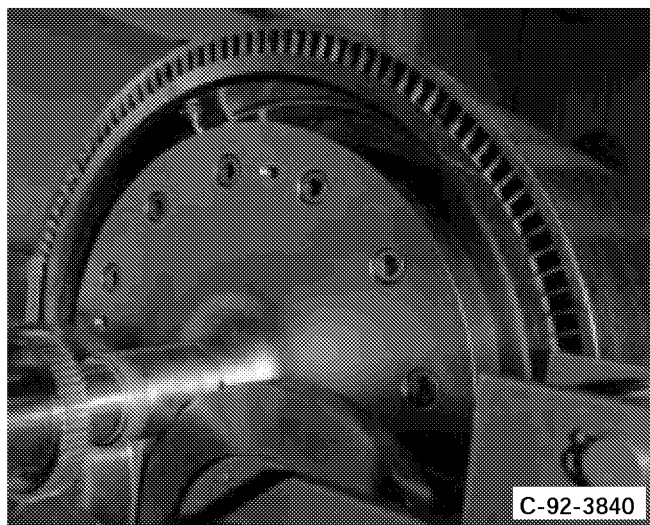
The 18-in. rotor with the 0.25-in.-wide passages on the balancing machine. A dynamic pressure transducer can be seen inside the rotor at the upper left.
